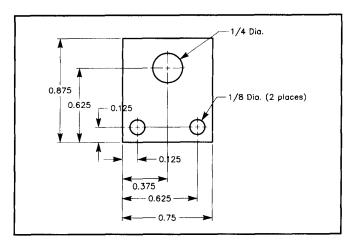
Input circuit capacitor C1-C2 mounting insulators are made from 1/16-in. thick G-10 circuit board material, from which the copper has been removed.
